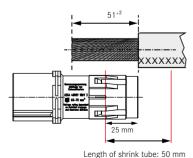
Shrink tube assembly over the cable and contact for Han® HC Modular 650
